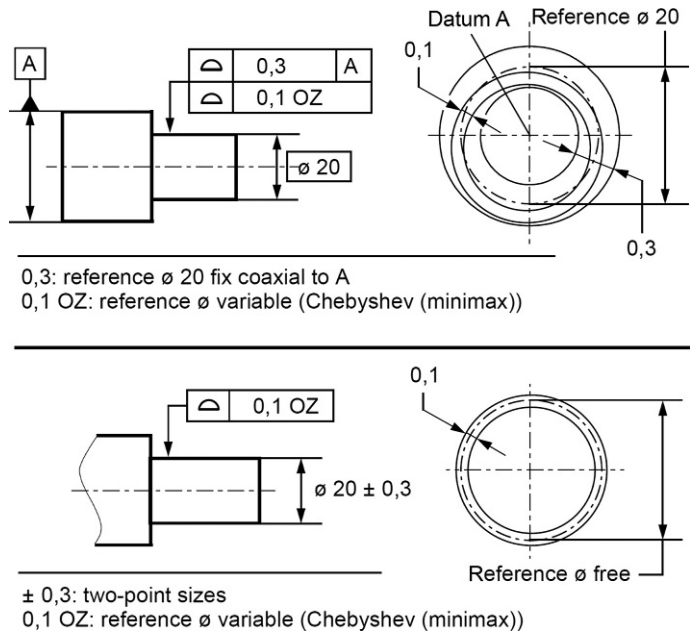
Form tolerance of a cylinder, upper diagram with the diameter fix, lower with the diameter variable, location 0.1 zone defined by Chebyshev
